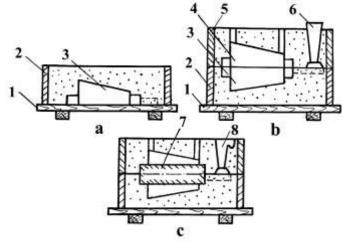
Moulding process: a-drag moulding; b-cope moulding; c-assembled mould: 1 –board; 2, 5 – flasks; 3,4 – parts of a pattern; 6 – gating system pattern; 7 – core; 8 – gating system
